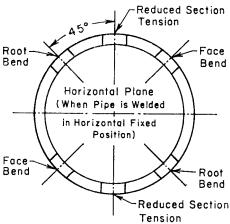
Order of Removal of Test Specimens from Welded Pipe or Cylindrical Castings 1/16 to 3/4 in. [1.6 to 19.0 mm] Thick
